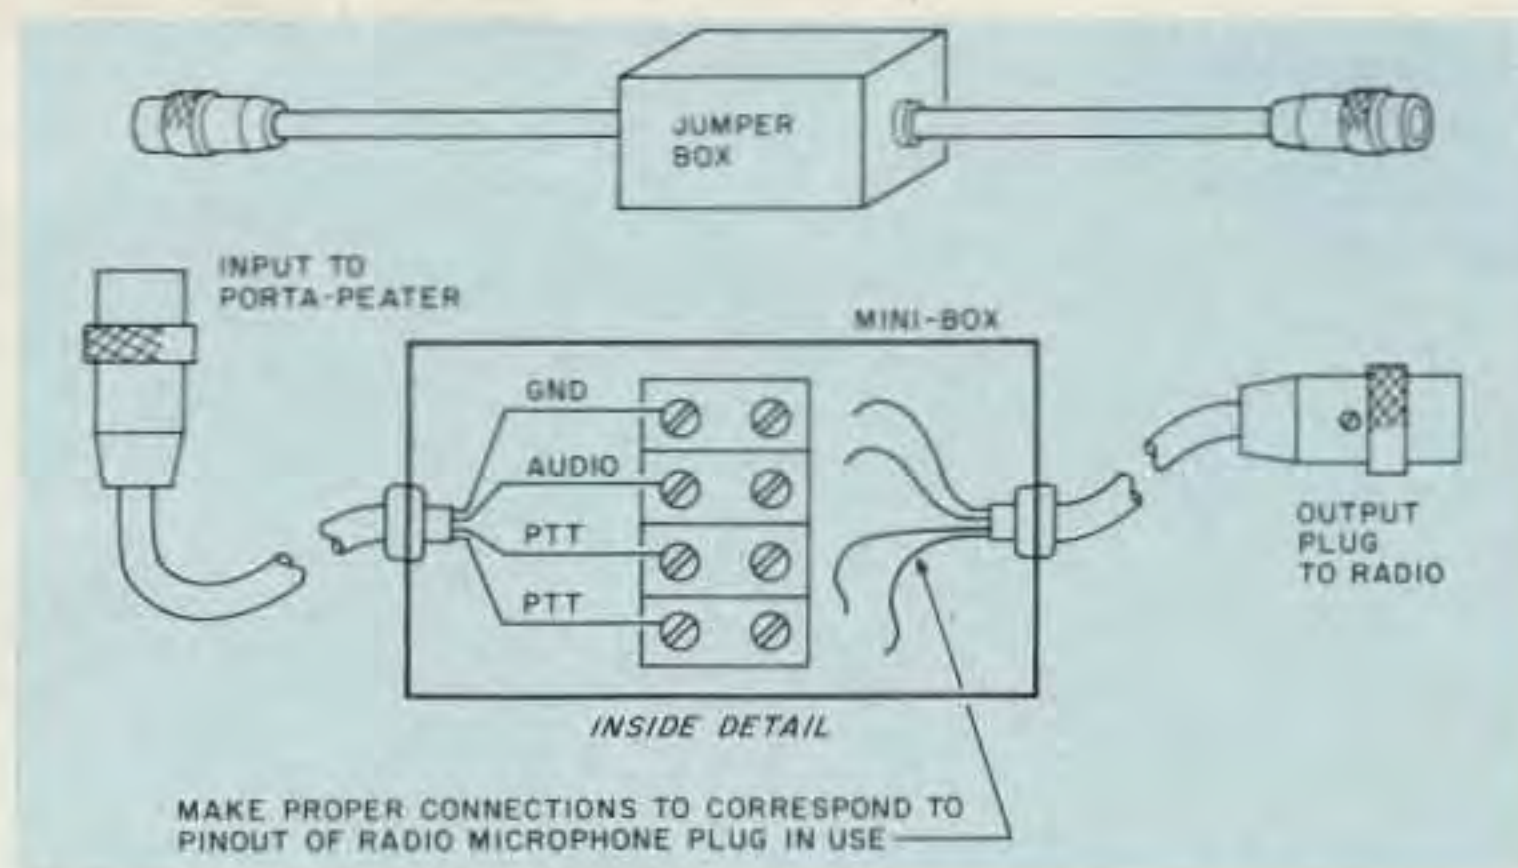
A jumper box will solve the problem of a fistful of audio cables. Use shielded box and cables only.
